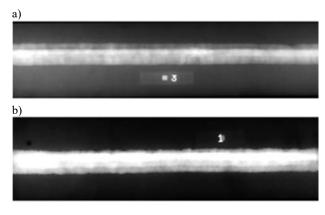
Radiographic photography of the welded joints for a) welded joint without faults (2202) and b) welded joint with incompatibility in the form of boundary bonding (2127)
